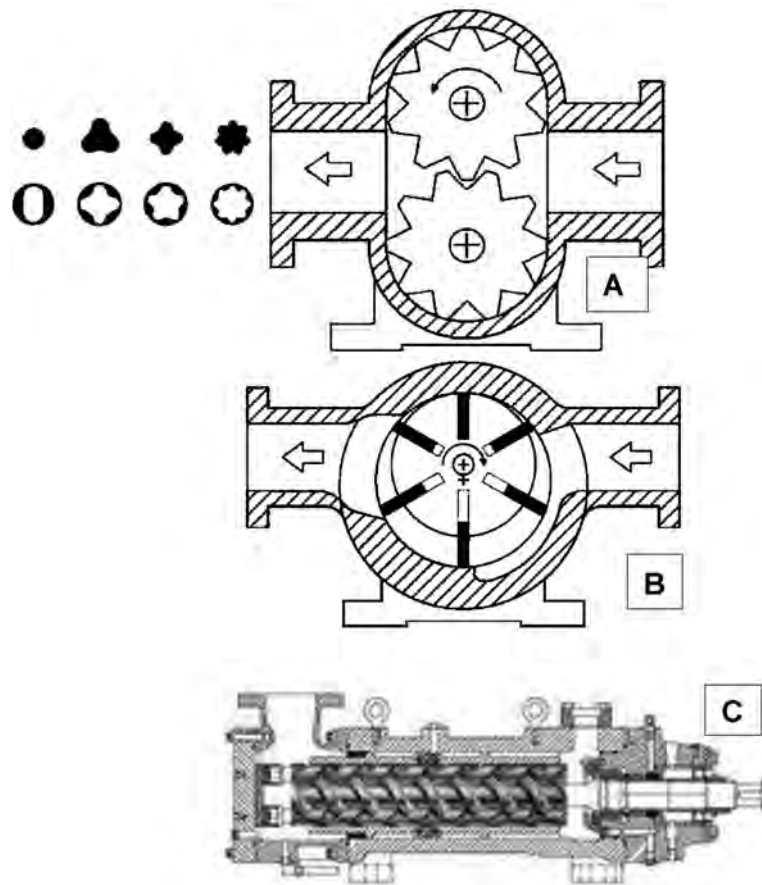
Positive displacement pumps (a: rotary gear with various rotor (solid) and stator lobe configurations, b: rotary vane and c: screw type) [6].
